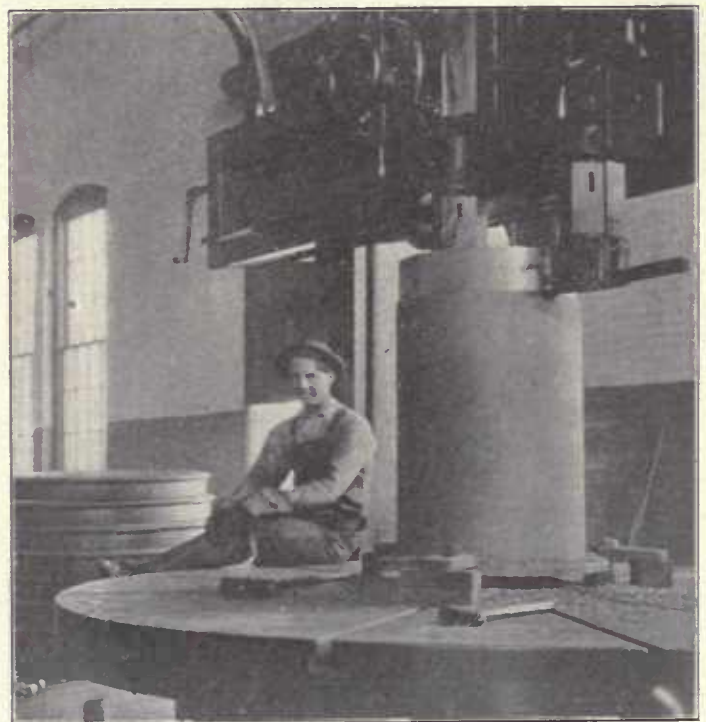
Turning and Boring a Cylinder Bushing in One Operation.
